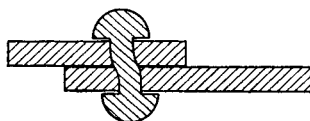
Rivet formed in shear. This is usually caused by misuse of the riveting tools or failure to line up the holes drilled in the parent metals correctly.
